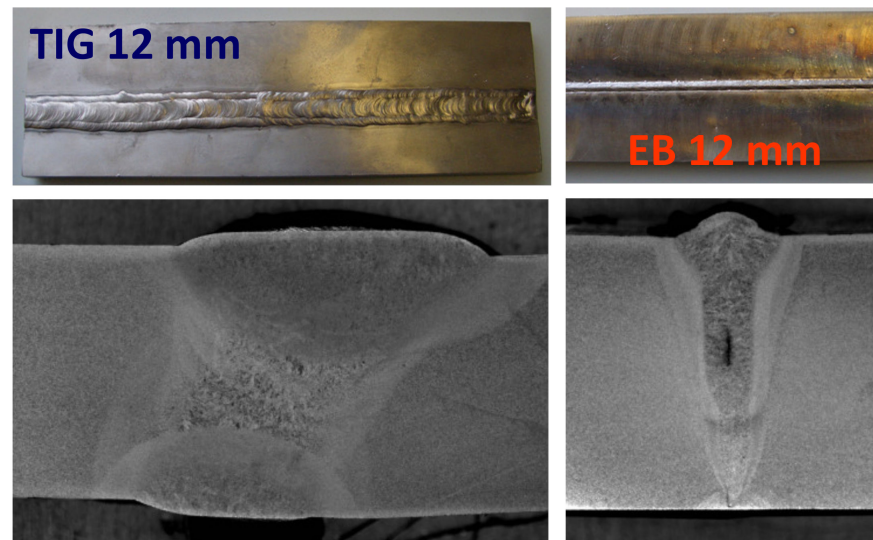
(Lower row) 12 mm $\frac{1}{2}$ -V tungsten inert gas (TIG) weld and 12 mm electron beam (EB) weld with beam stopper; (upper row) look on the weld lines from top.
